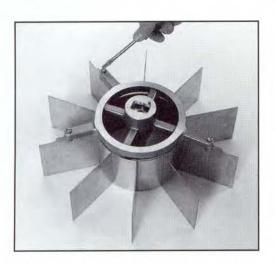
To disassemble the Divider Blade from the Divider Plate, remove the three screws and separate these pieces.
